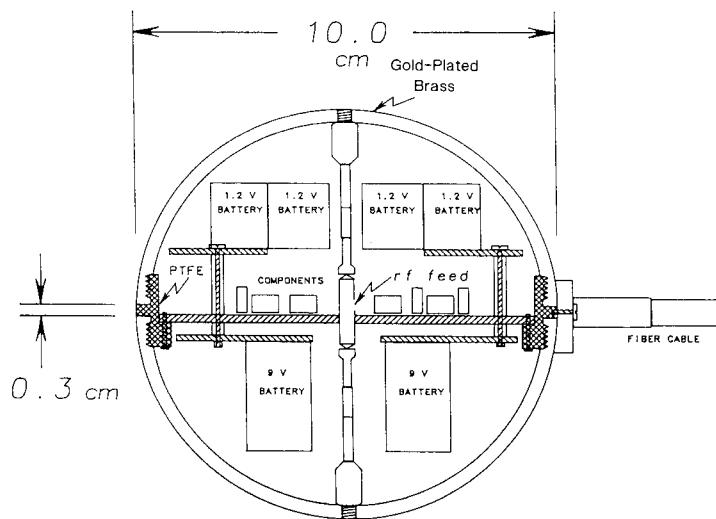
Mechanical drawing of the spherical dipole radiator.
